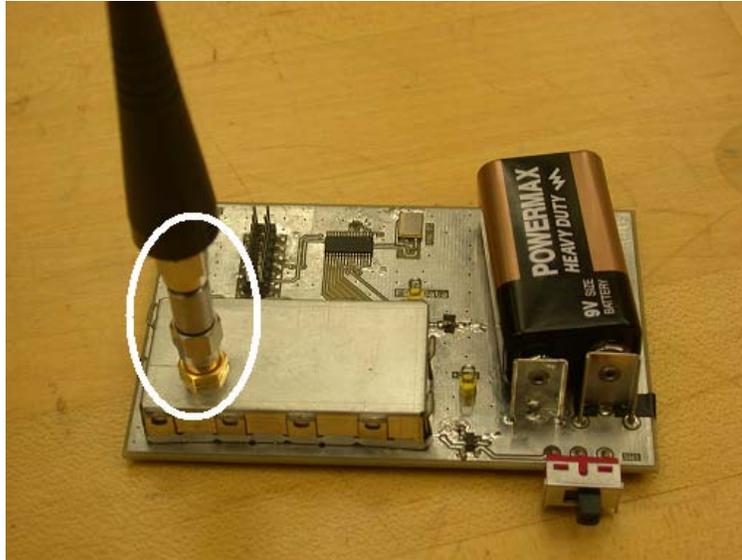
Receiver Unit Showing Exposed Fence of the PCB Board-Level Shield
